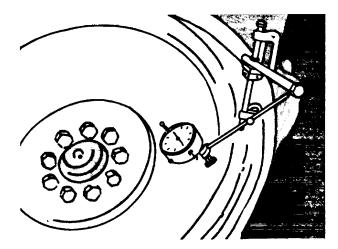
N-50. Check the Flywheel Clutch Face with the Indicator
